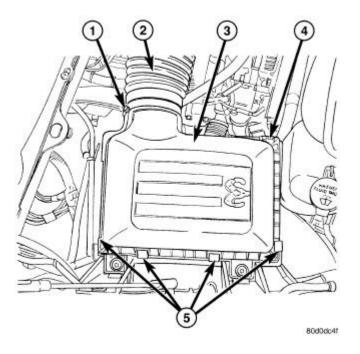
AIR CLEANER HOUSING COVER Courtesy of CHRYSLER LLC
